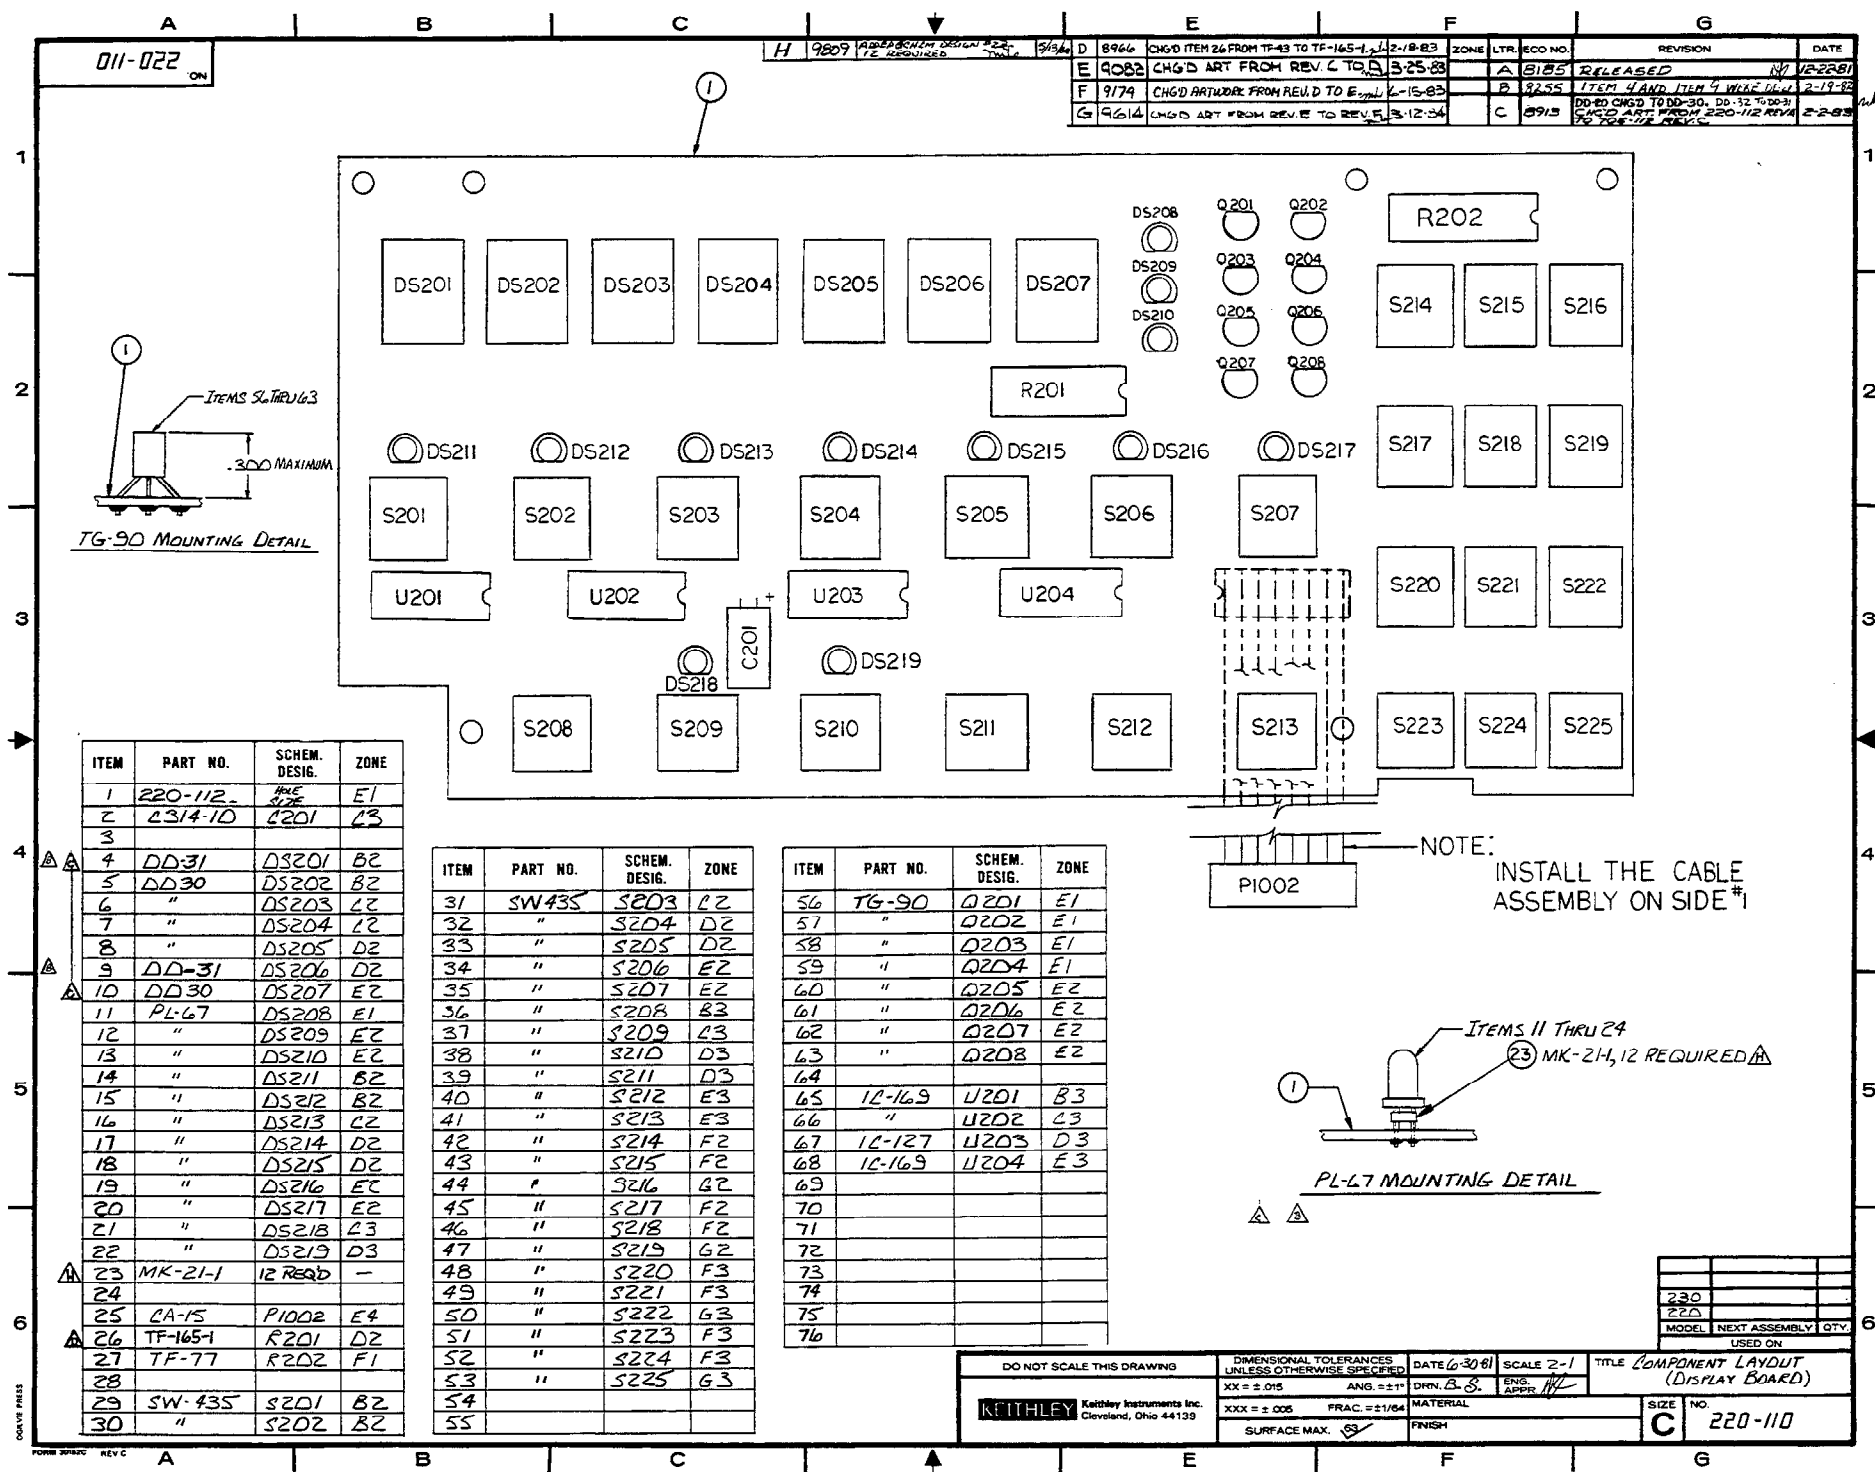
Display Board, Component Location Drawing, Dwg. No. 220-110
